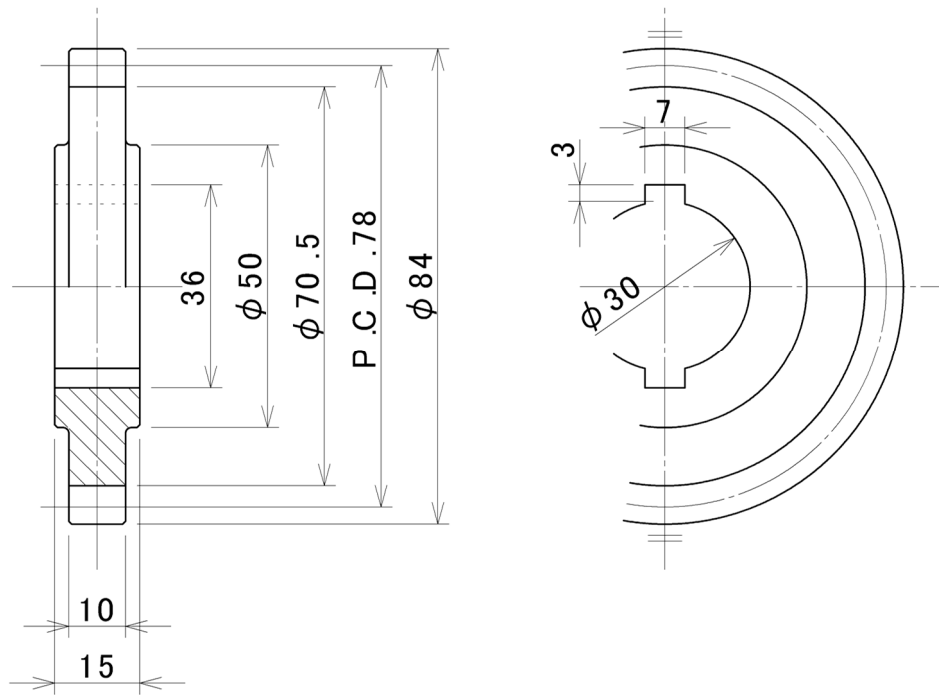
Drawing of P/M spur pinions/gears used surface durability test
